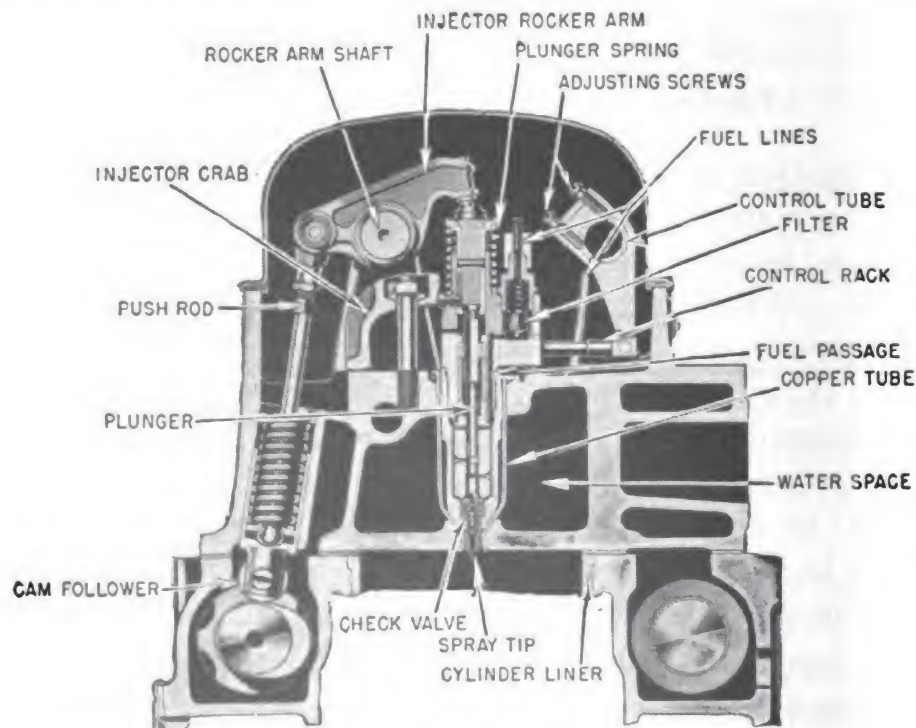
Mounting of the unit injector in the cylinder head.
